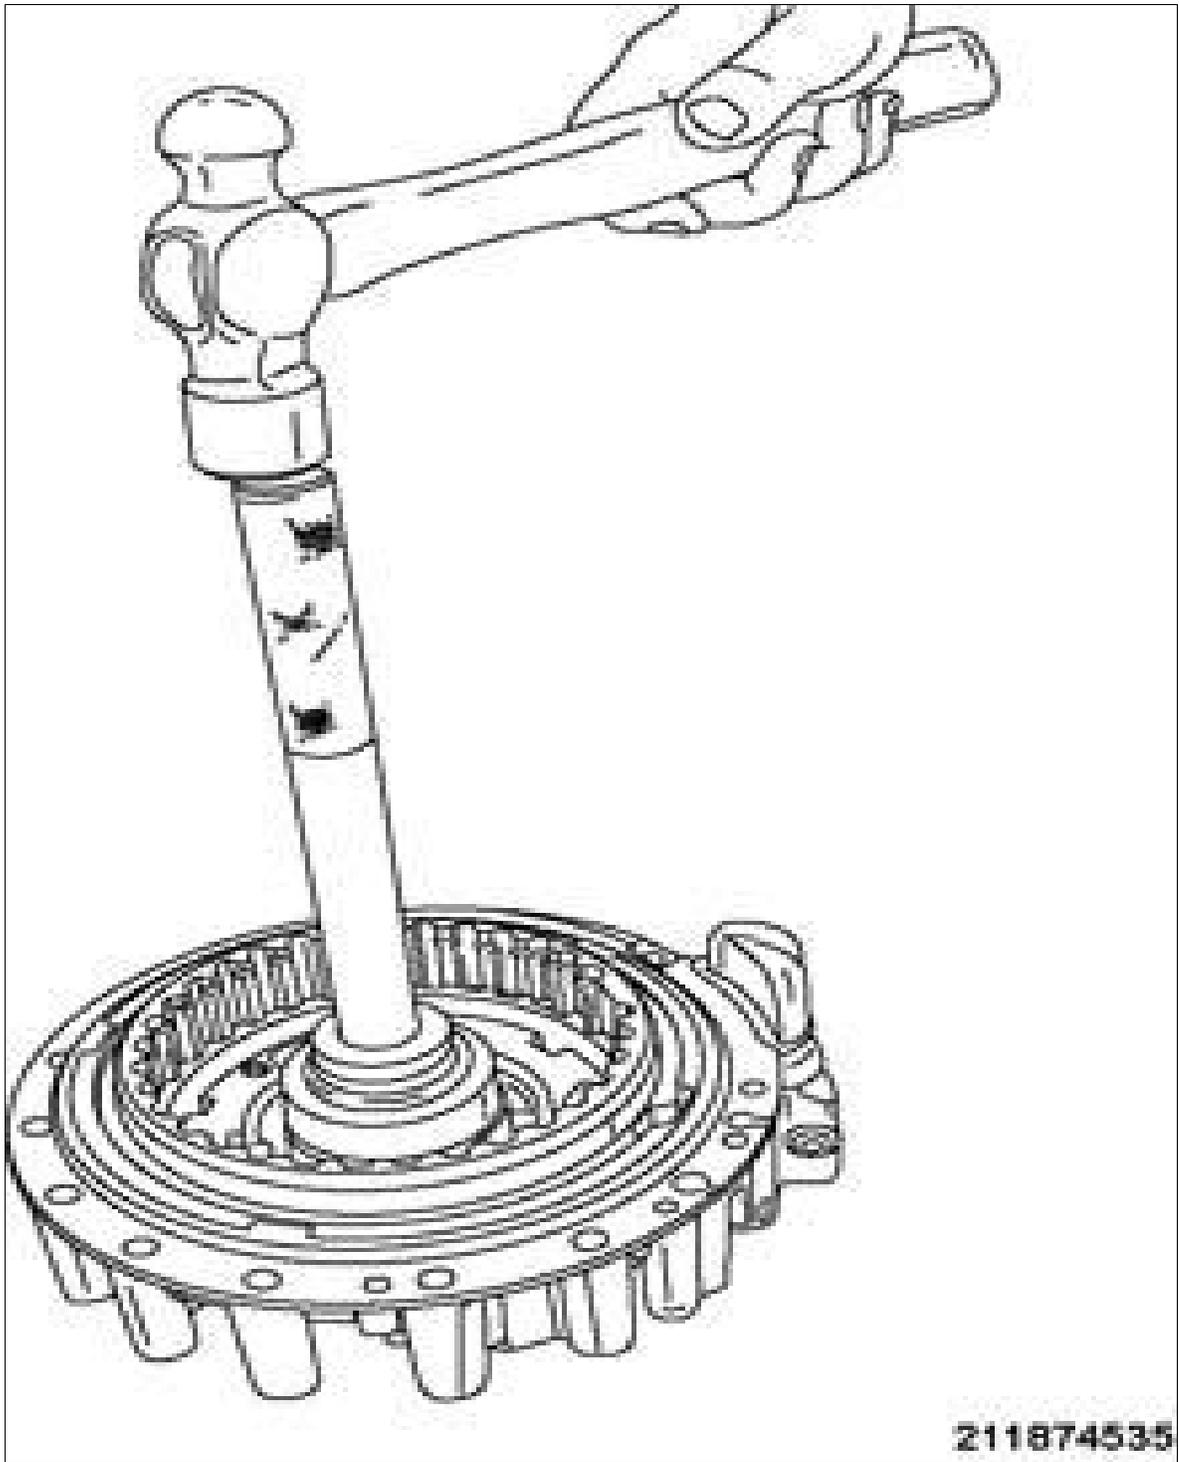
Oil Pump Needle Bearing & Oil Pump Cover
